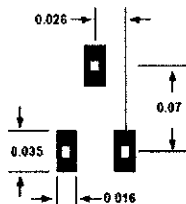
PCB Pad Layout, SOT-323 (dimensions in inches)
